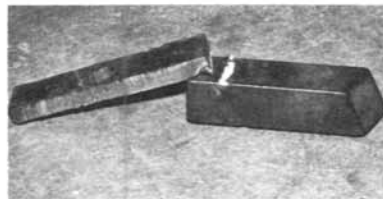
Clip test determines whether two pieces of metal are weldable. Pieces are welded and then broken apart in a vise. Bead that pulls away from the metal, rather than breaking along the center of the bead, indicates the metal is not weldable.
